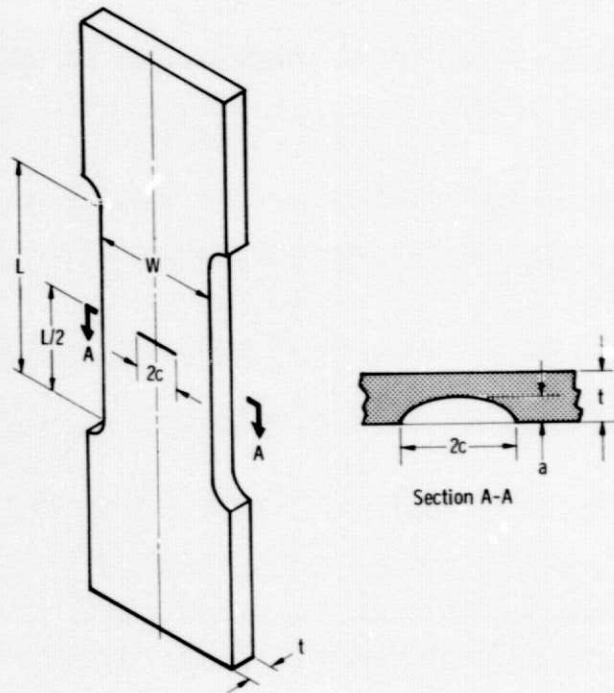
Typical surface-crack specimen (grip details omitted) and nomenclature.
